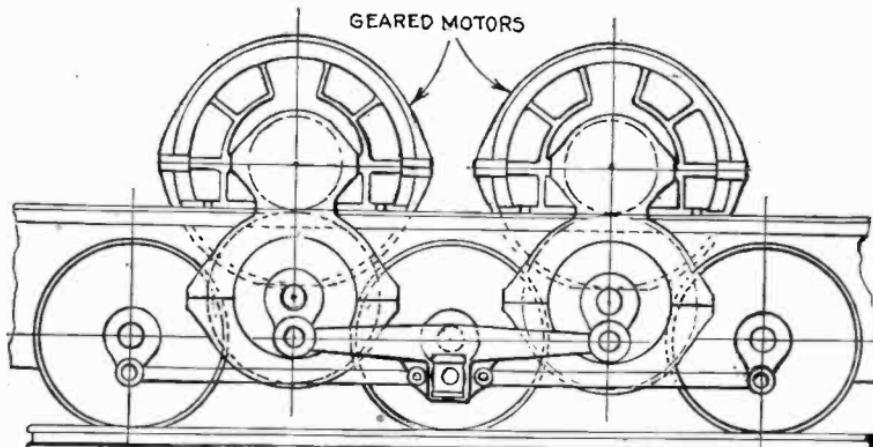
,168.—Method of mounting locomotive motors with both gears and connecting rods. The drive is through a form of Scotch yoke and side rods as shown.
